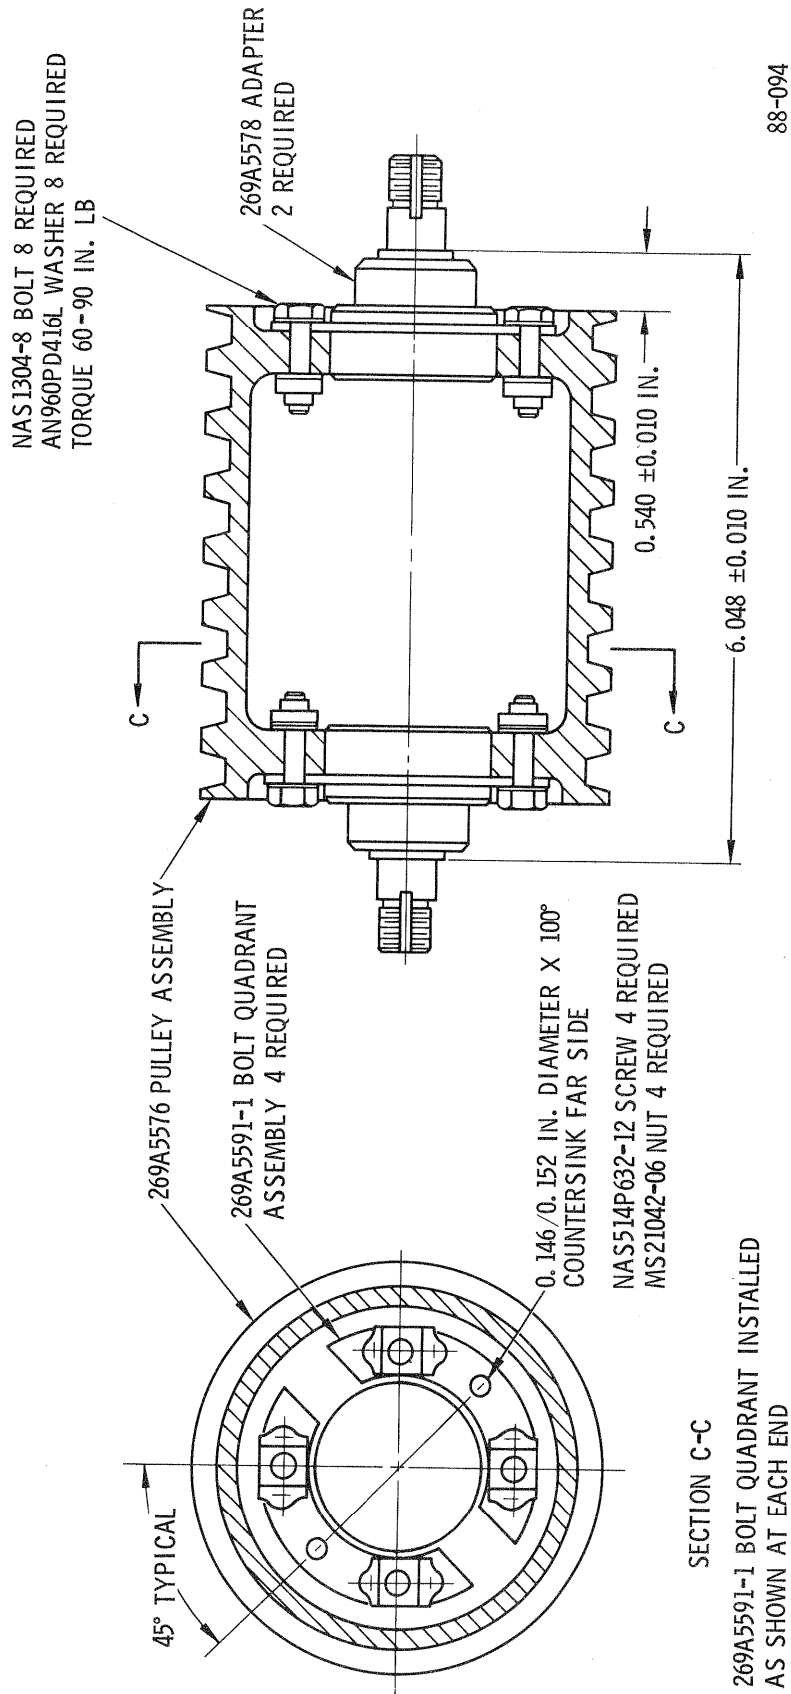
Modification - Belt Drive Idler Pulley Clutch Assembly
